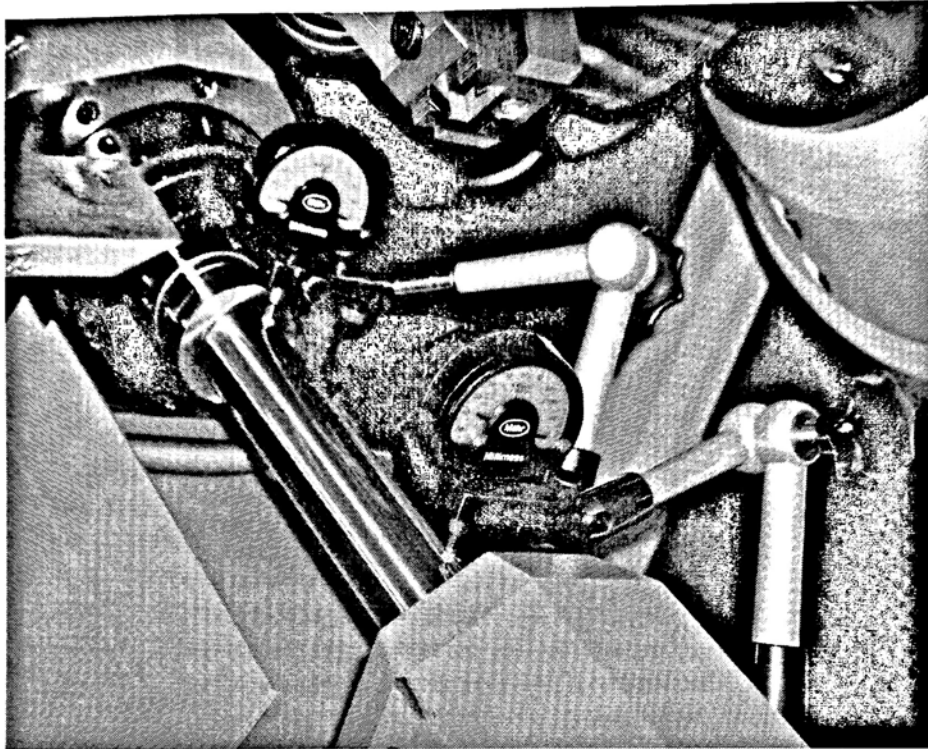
Measuring radial run-out with clamped main and counter-bearing
